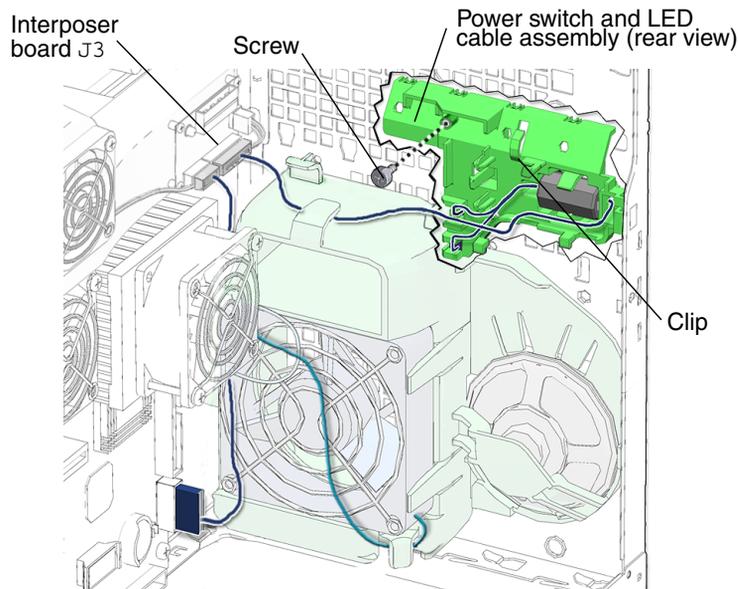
Disconnecting the Power Switch and LED Cable Assembly
